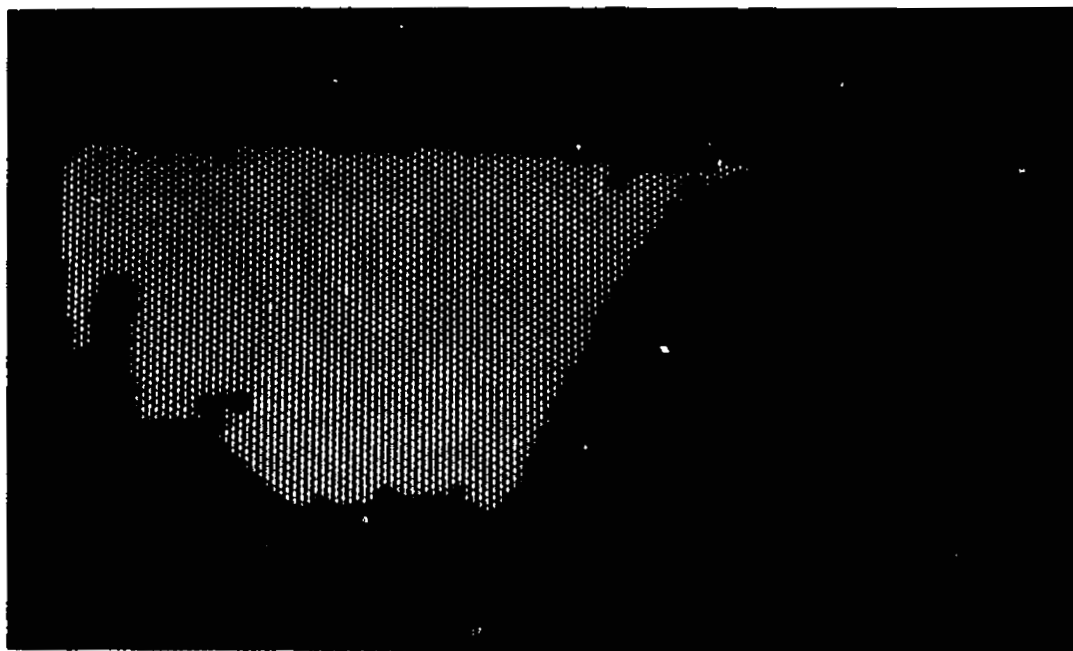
Processed image of the tool after machining the AISI C1045 steel for 43.0 mins
